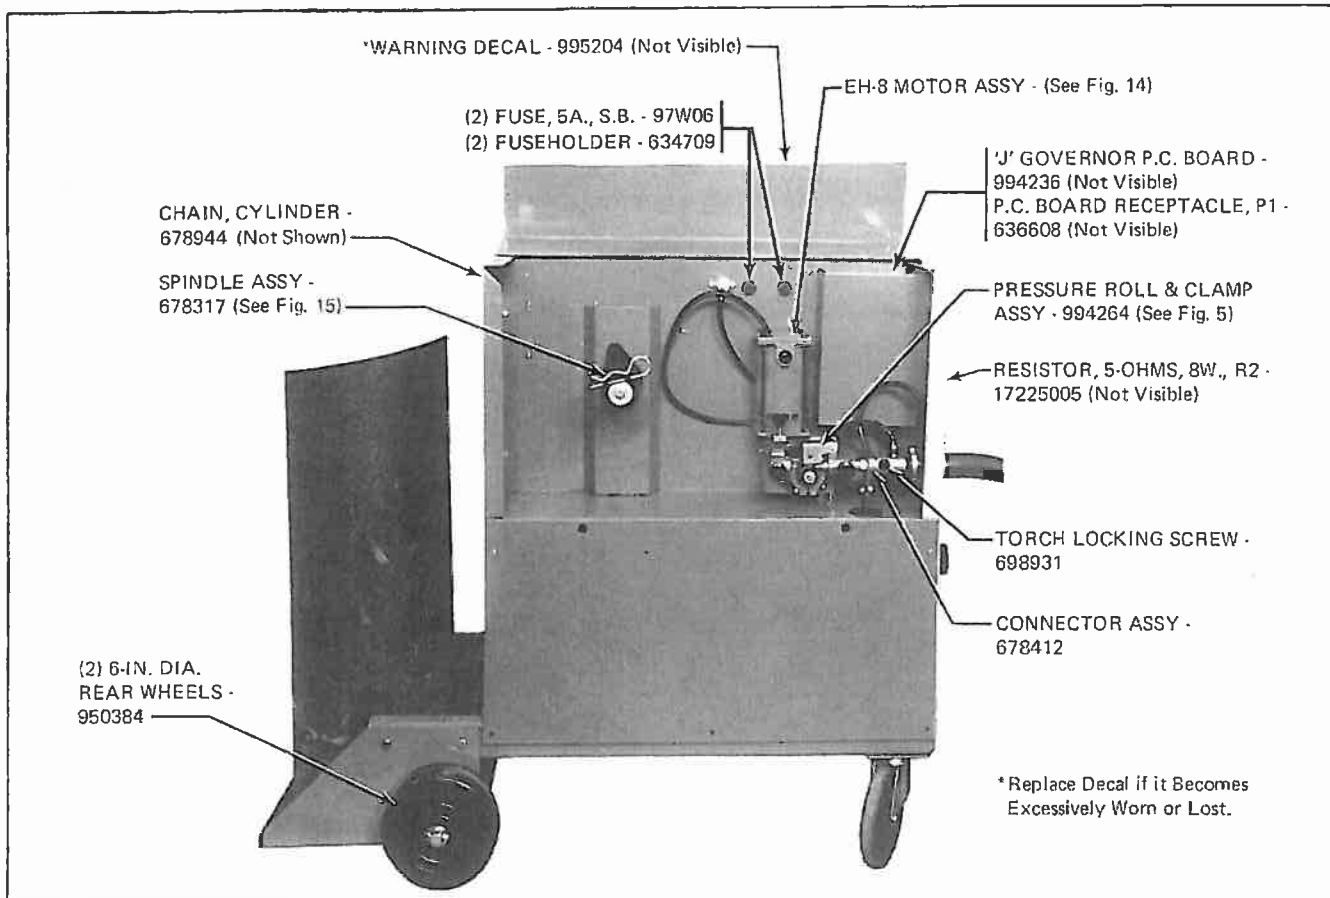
Left Side View, Migmaster LINDE 225, P/N 600507
